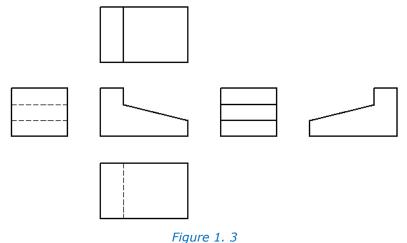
3 shows how the drawing would look like after cutting and spreading out the box.
